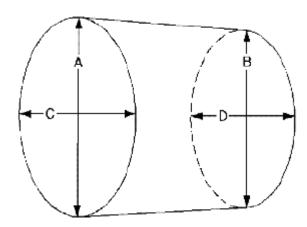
Inspecting Crankshaft Main Journals For Undersize Courtesy of SUZUKI OF AMERICA CORP.
